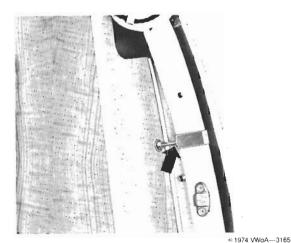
Position of rear bracket (arrow) on closet and on body rear side panel. The luggage compartment lid must be opened for access.
